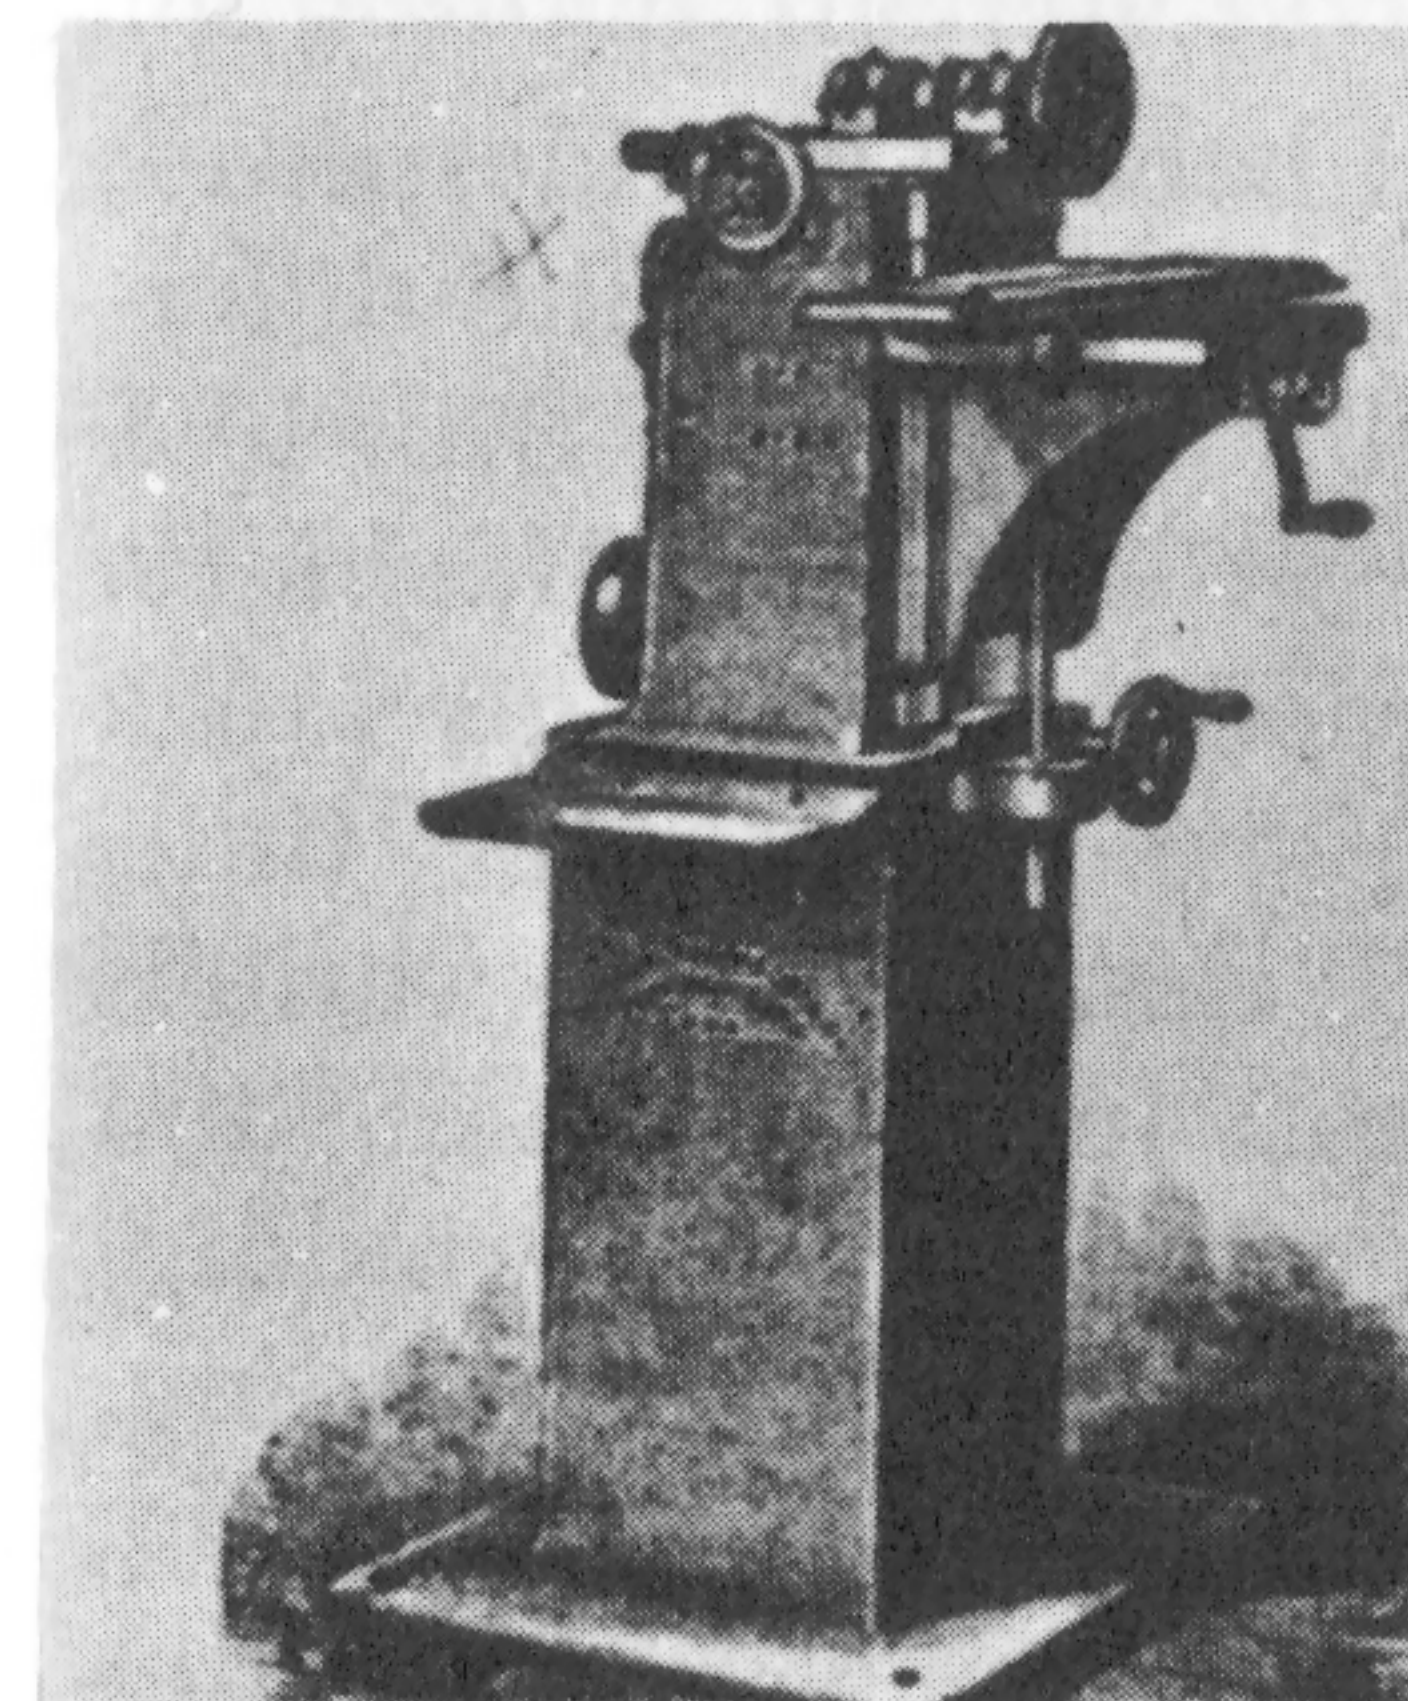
C KNEE TYPE SURFACE GRINDING MACHINE, 1887
